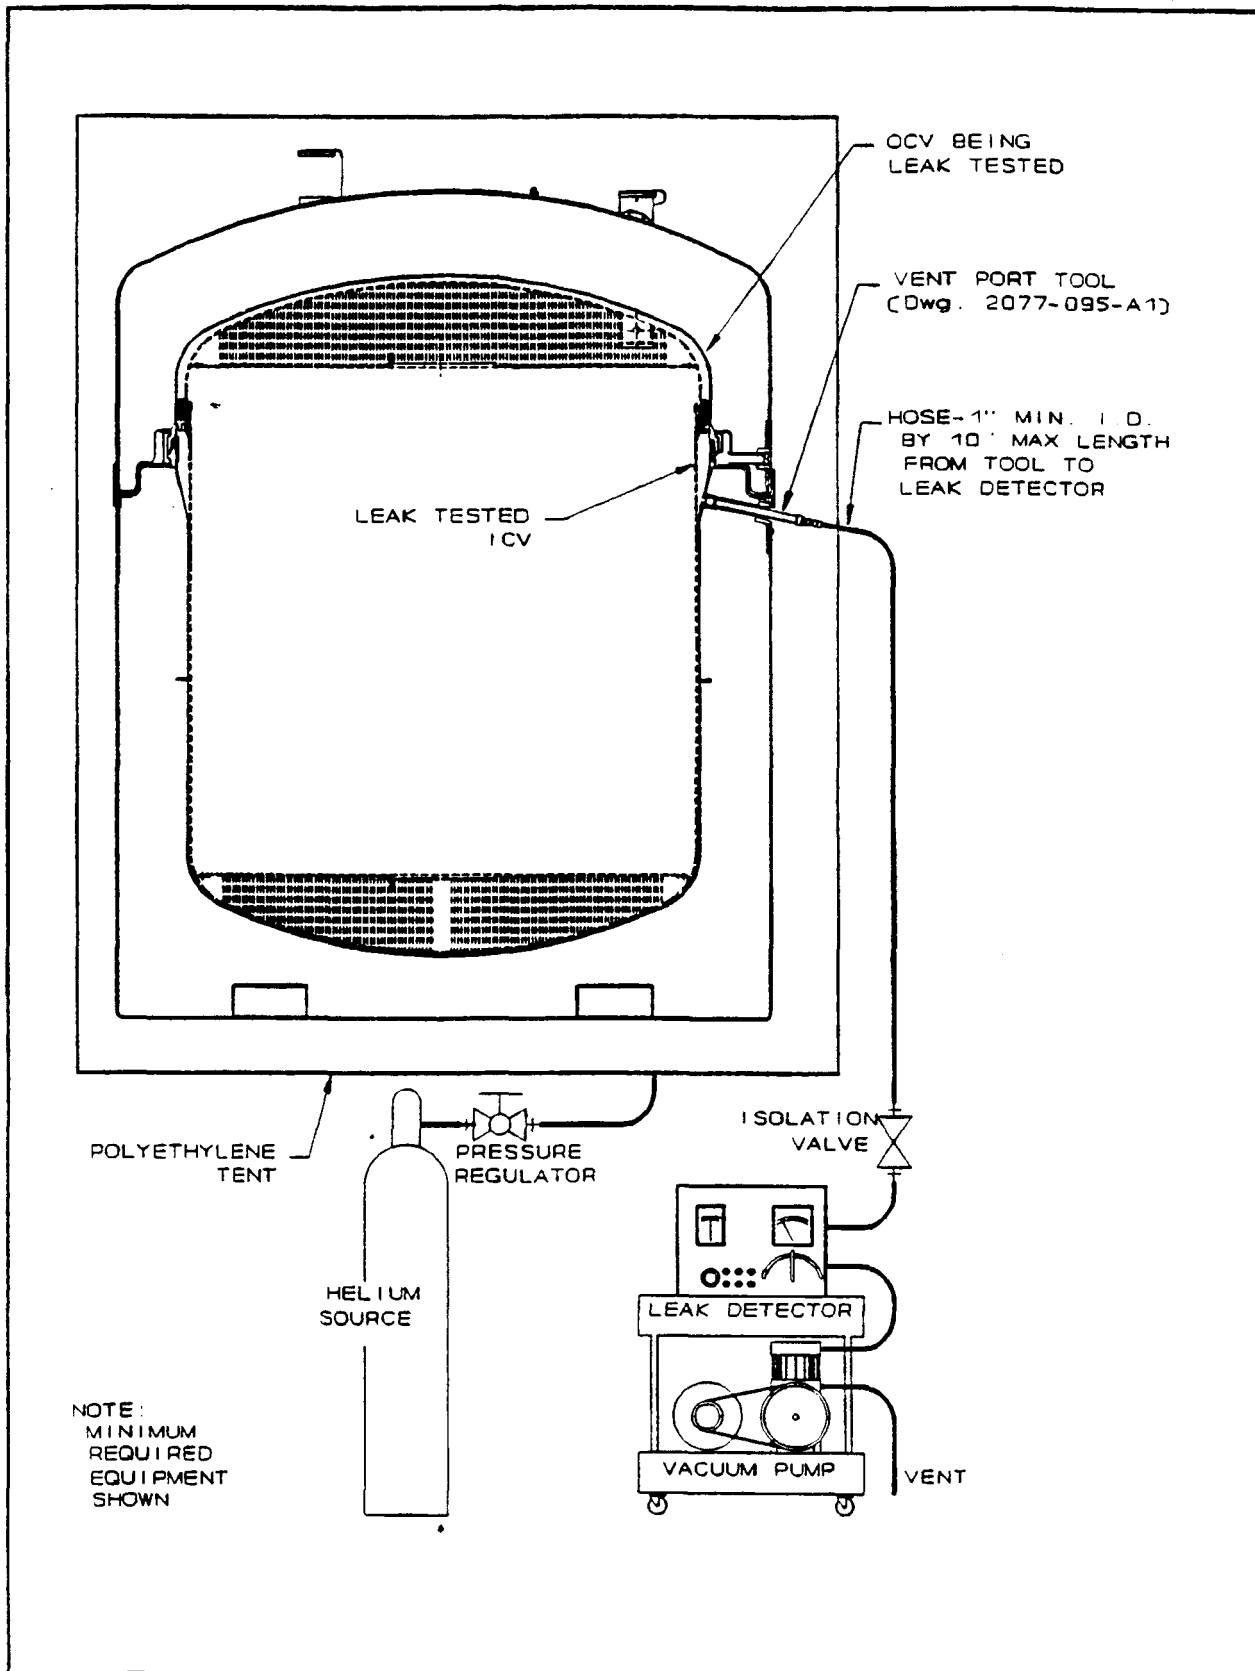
Vessel Weld Leak Test Setup Support Arrangement for Assembled OCV
